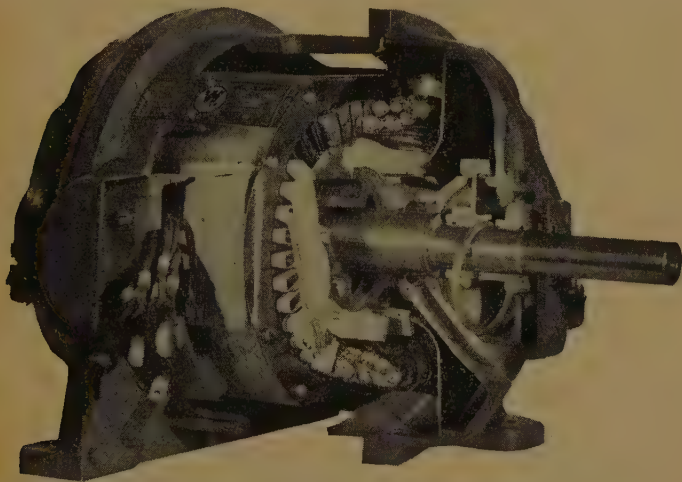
Assembled squirrel-cage induction motor with frame cut away to show internal appearance. *Westinghouse Elec. & Mfg. Co.
